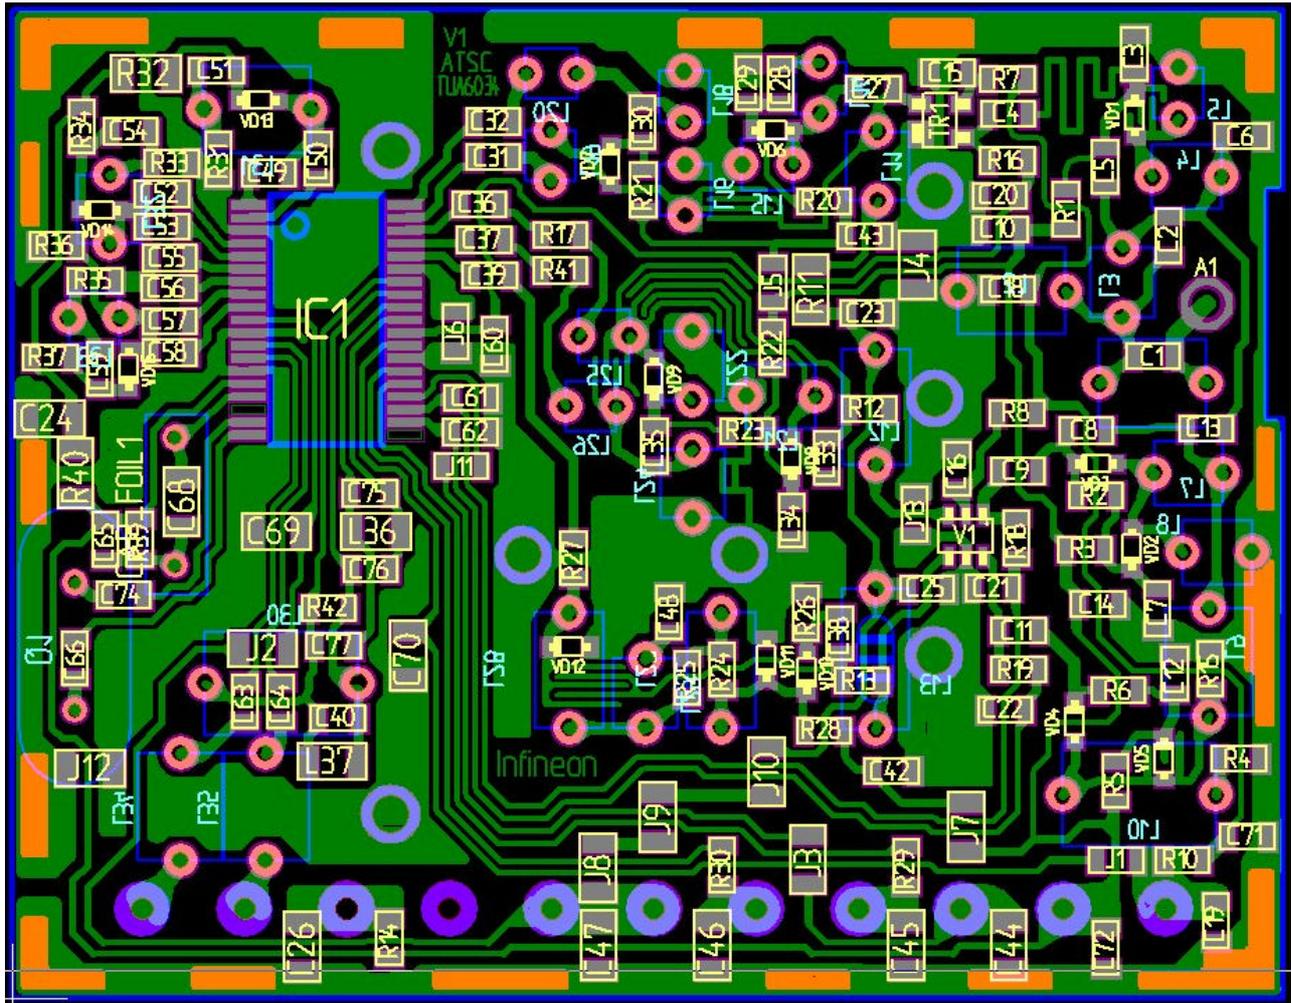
PCB Layout of the ATSC Reference Tuner with TUA6034-T
